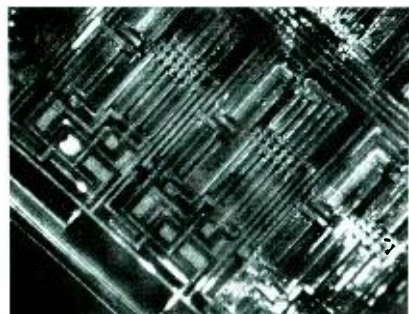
Liquid crystal assembly on a packaged integrated circuit.
